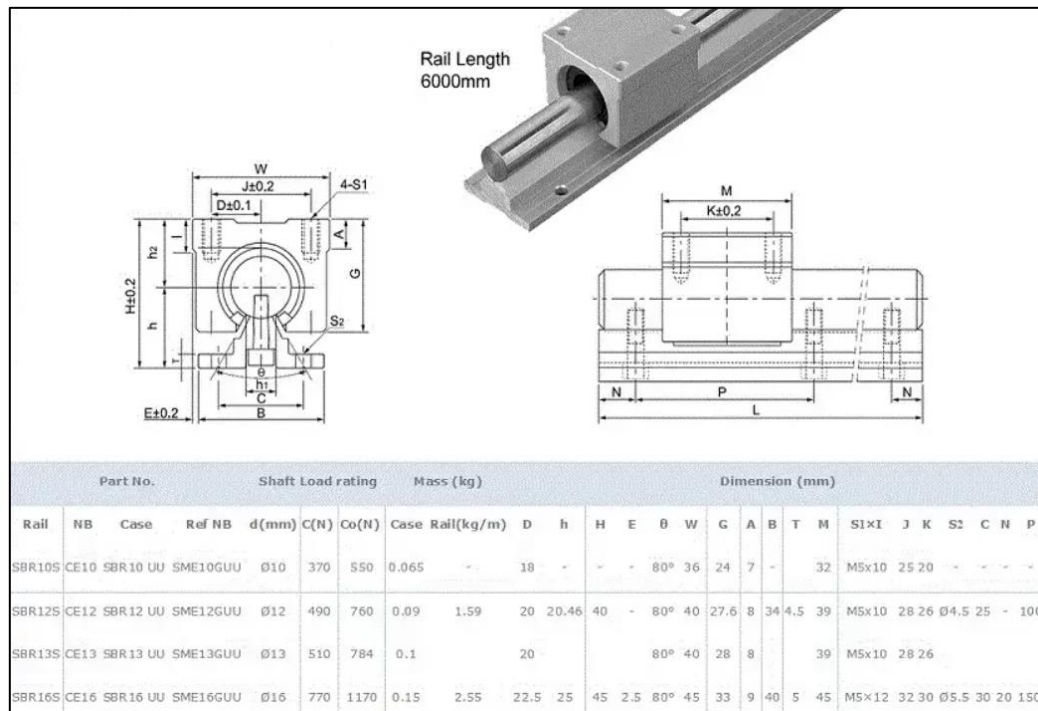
A datasheet excerpt 2D drawing with dimensions from the SBR linear guide rail datasheet (SZ Bearing 2018).
